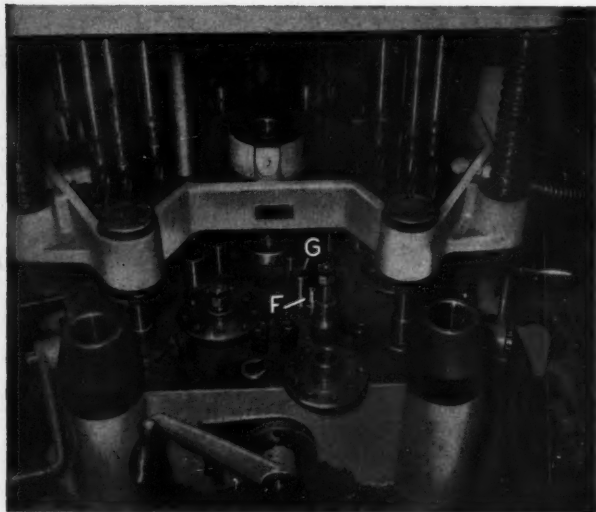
The hub side of the cover casting is machined on this B.S.A. Acme-Gridley 6-spindle automatic on which Coromant clamped-tip tools are used wherever possible
